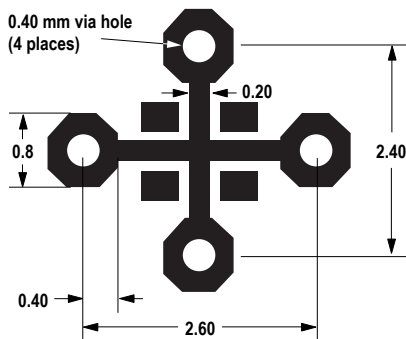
PCB Pad Layout, High Isolation MiniPak (dimensions in mm).
